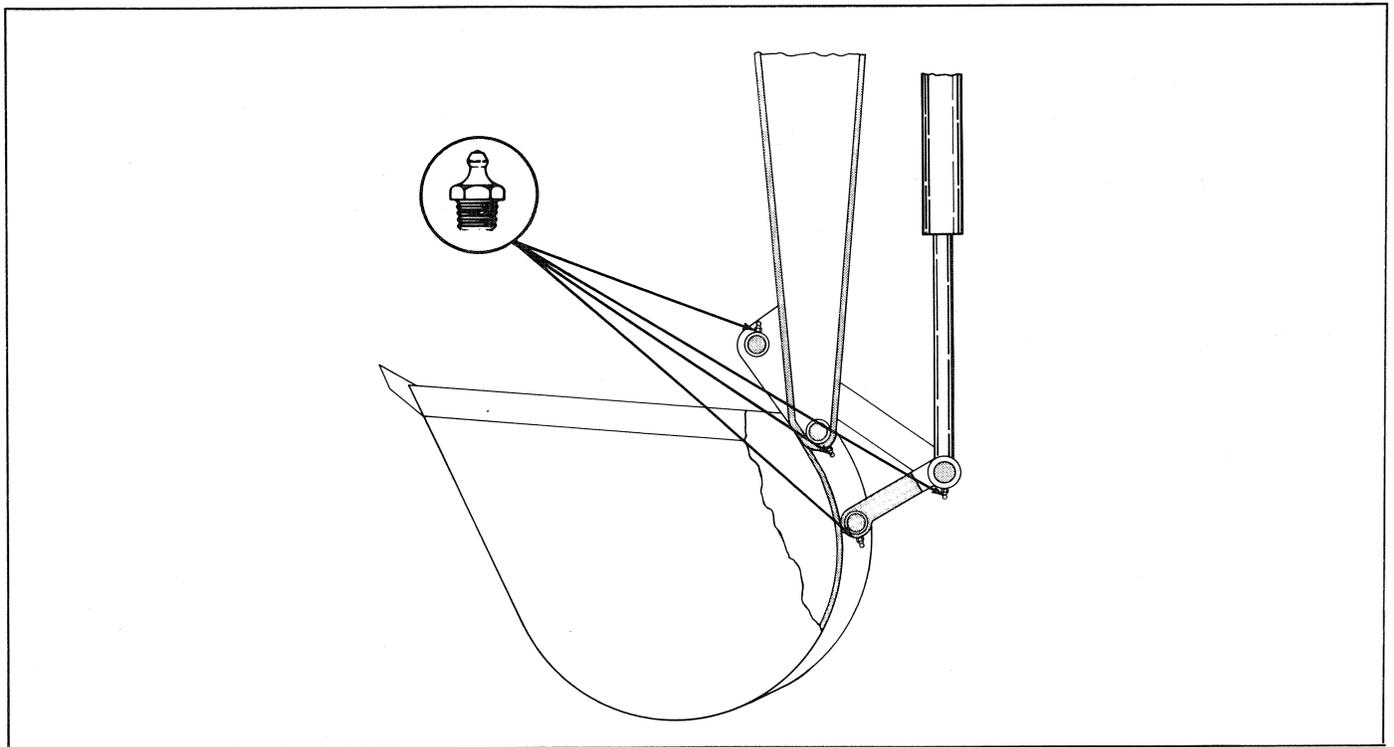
Grease Fittings on Rod End of Tool Cylinder, Dipperstick to Bucket Hinge Pin and Connecting Link Hinge Pins.
